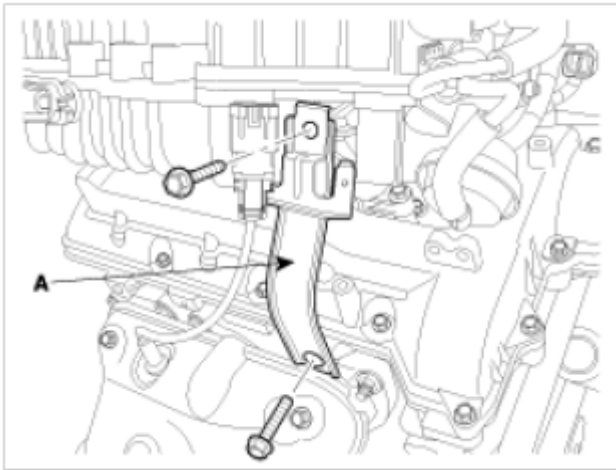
Identifying Surge Tank Stay With Mounting Bolts
